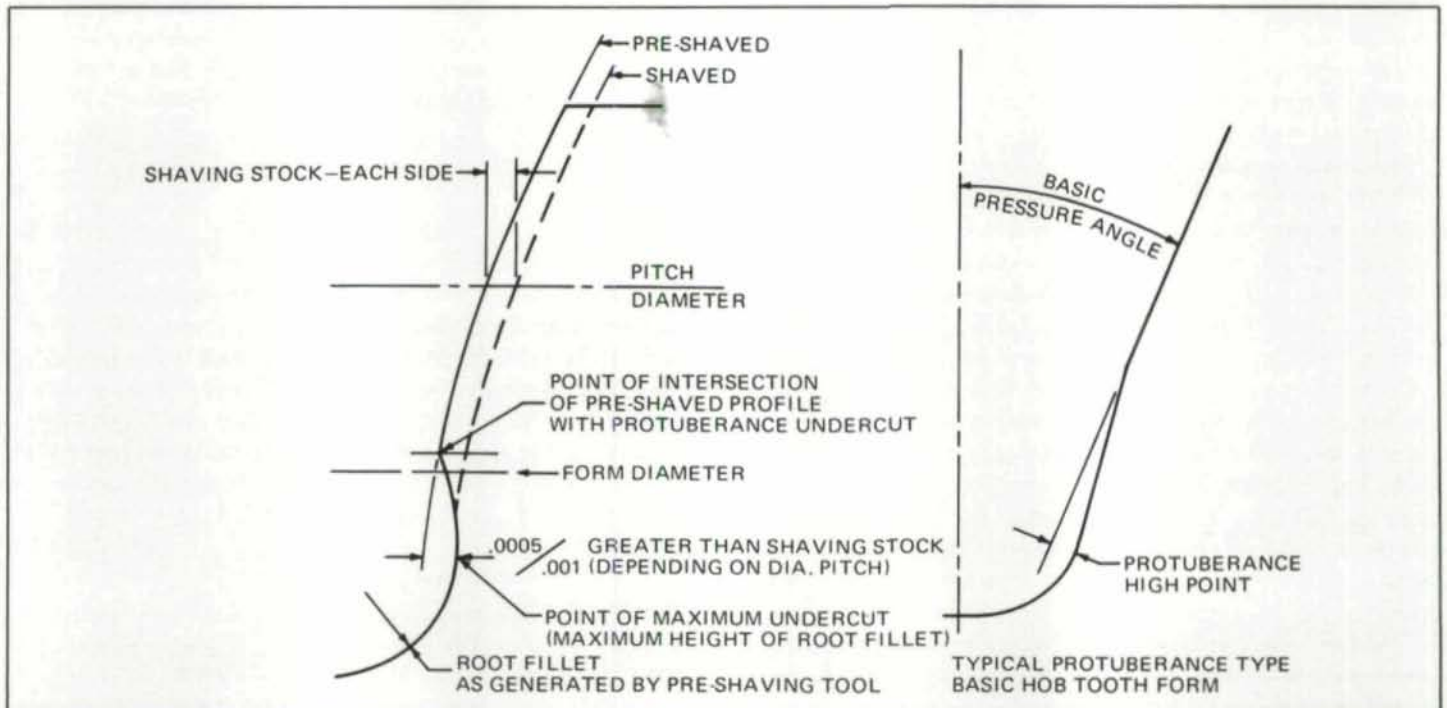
Undercut produced by a protuberance hob and the basic hob tooth form.
